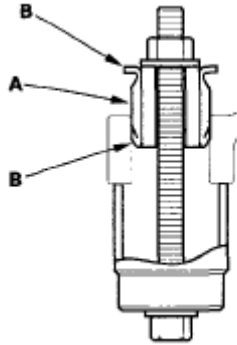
Identifying Mild Soap And Water Solution To Gearbox Mount Cushion Surface
